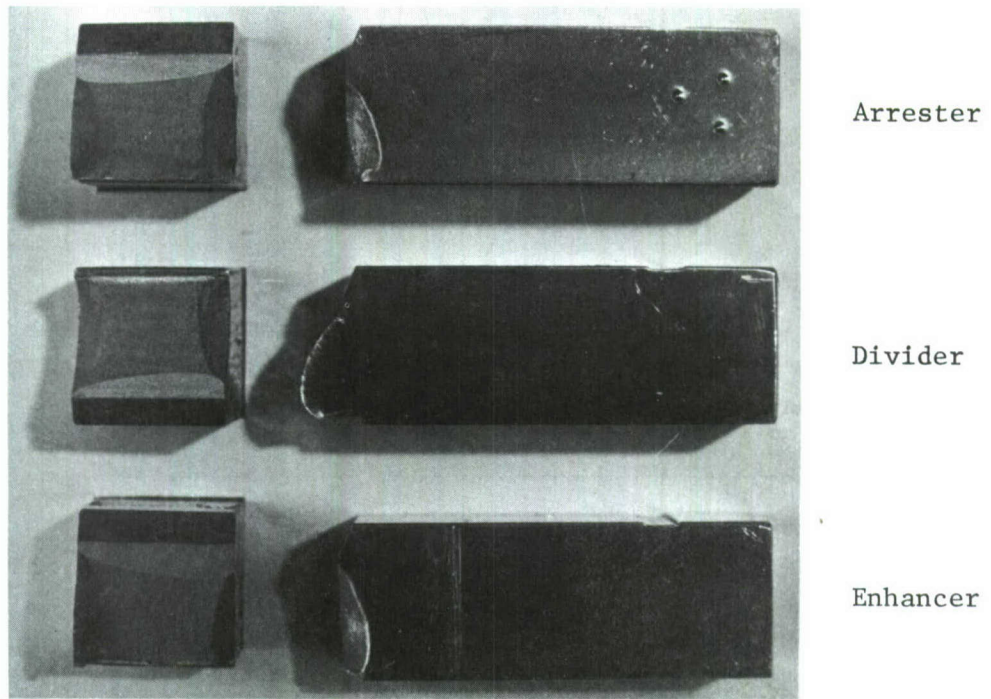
Typical fracture surface appearance of Billet #1 specimens.
